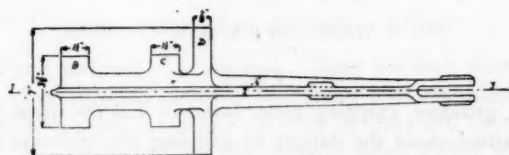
WEIGHT OF CASTING 16 POUNDS
